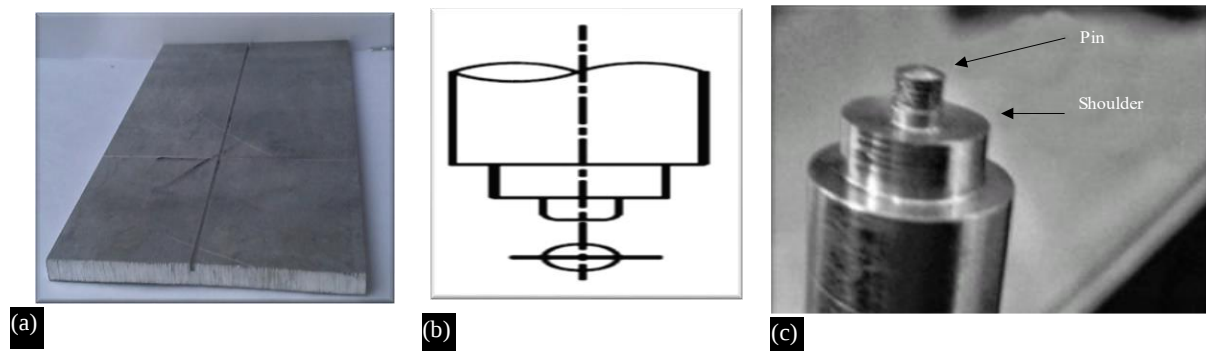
The Slot Cut in The Surface of AA7075 Billet Ready for FSP With Tool Made In H13 Tool Steel With Straight Cylindrical Pin And Its Orthographic Projection.
